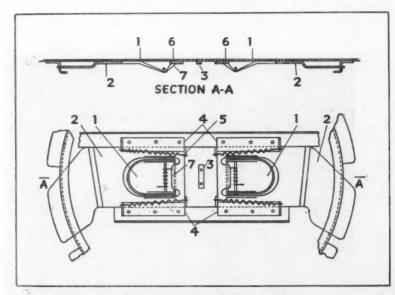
Method of securing the fuel filter cover on the Do 217.
